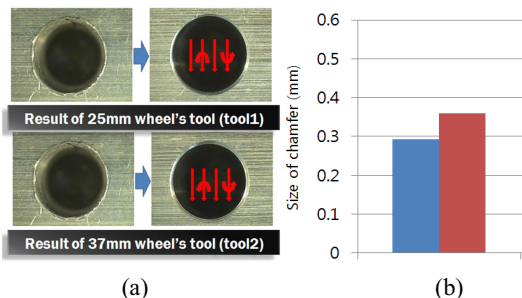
Deburring results for the burr formed on Al6061 workpiece with 0° exit surface inclination angle (a) image (b) average chamfer size (Tool 1-blue and Tool 2-red)
